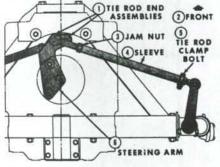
When checking toe-in on row crop wide adjustable axle, be sure steering arm is centered as shown. View is from top. When installing center steering arm, be sure steering motor is centered and install arm as shown.
